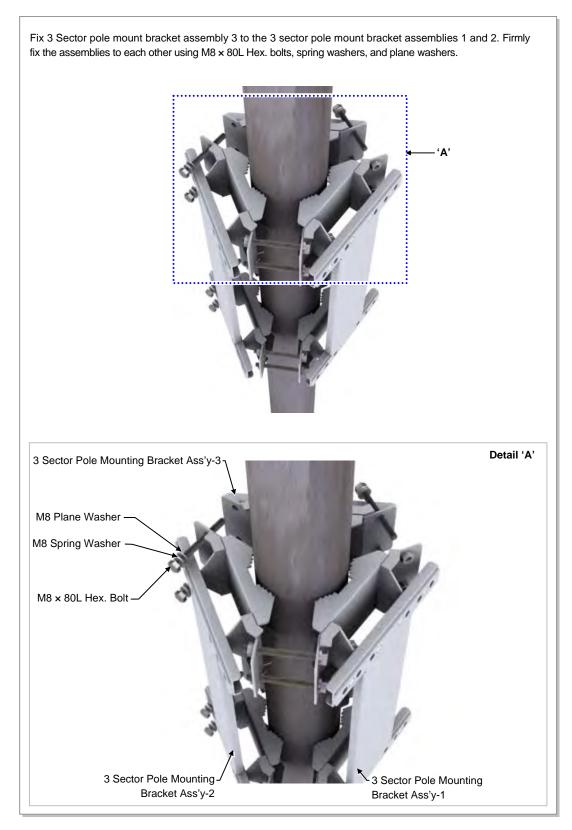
Fixing 3 Sector Pole Type RRH-2WB (3)
